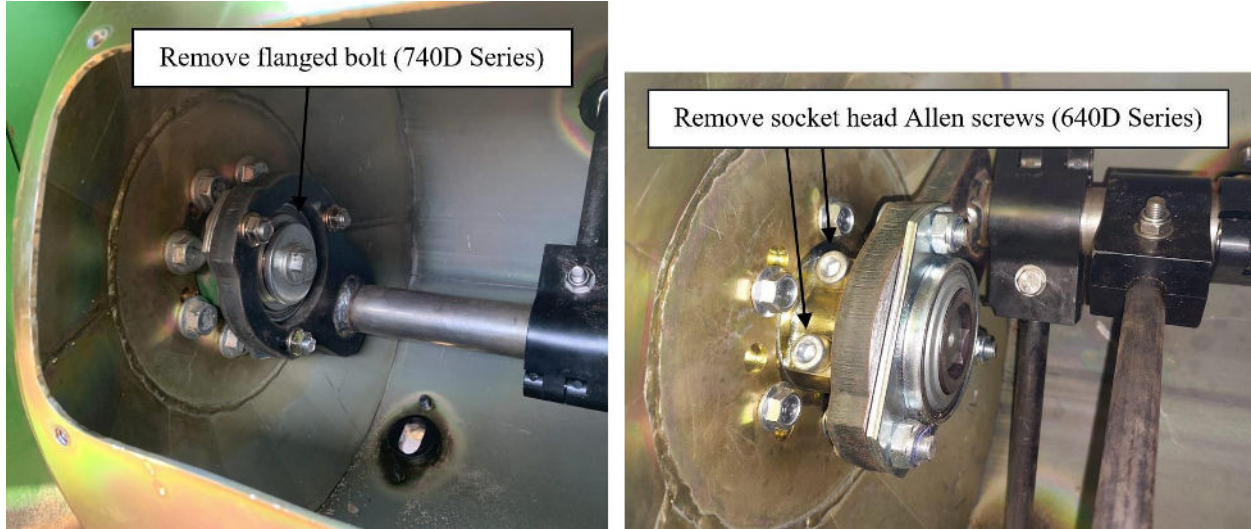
Drive shaft secured to the bearing for 740D series (left), for 640D series (right).
